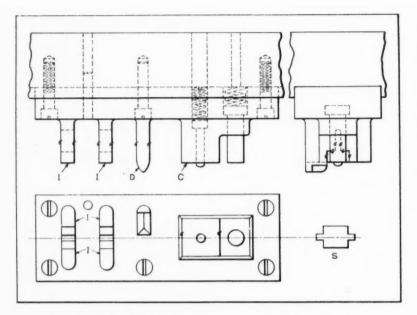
Plan and Elevation Views of Punch for Blanking Two Pieces S at Each Stroke
